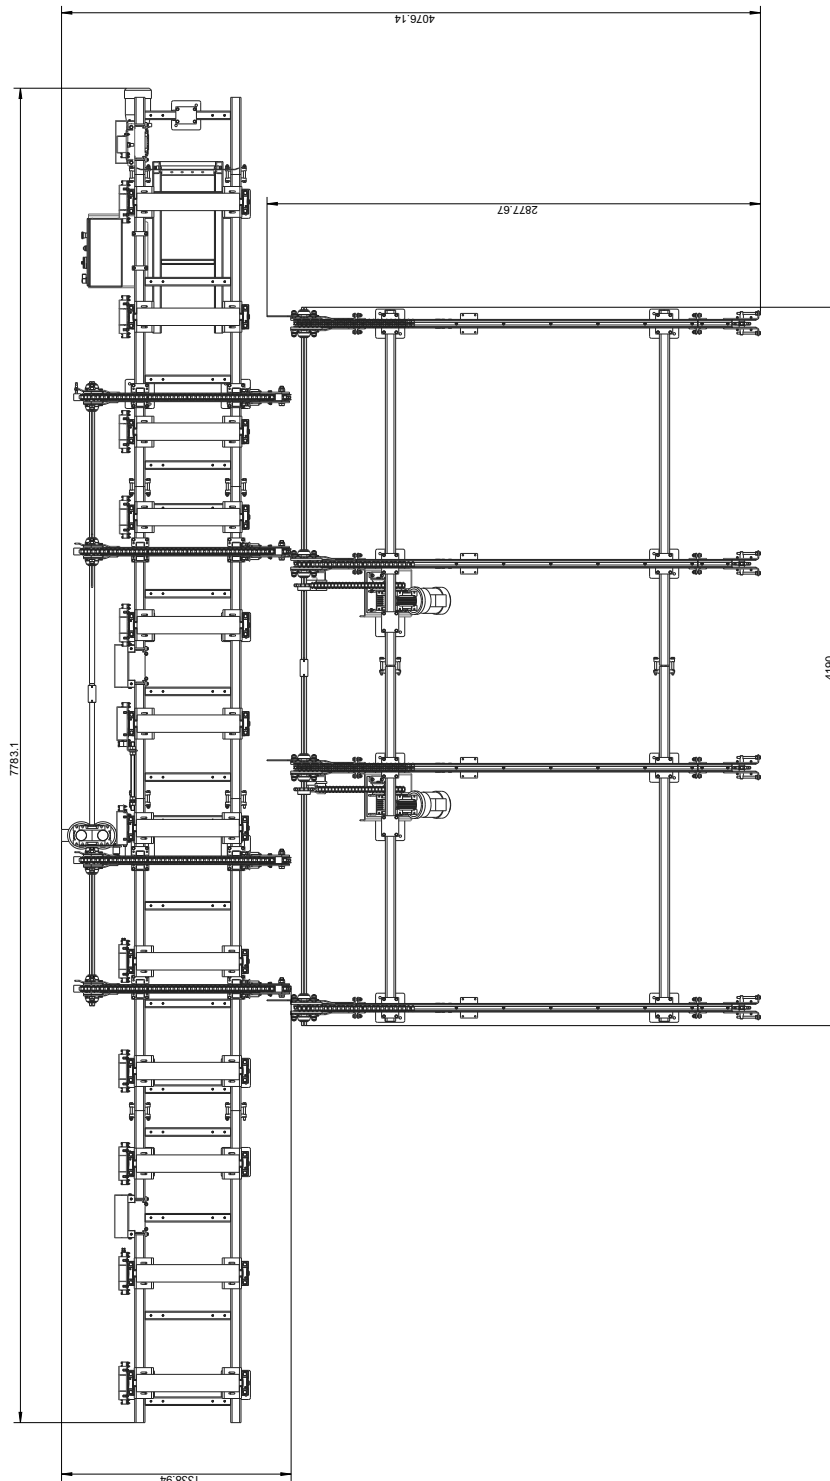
CR6-3.6 WITH CC2-2.7 OUTFEED CONVEYORS
